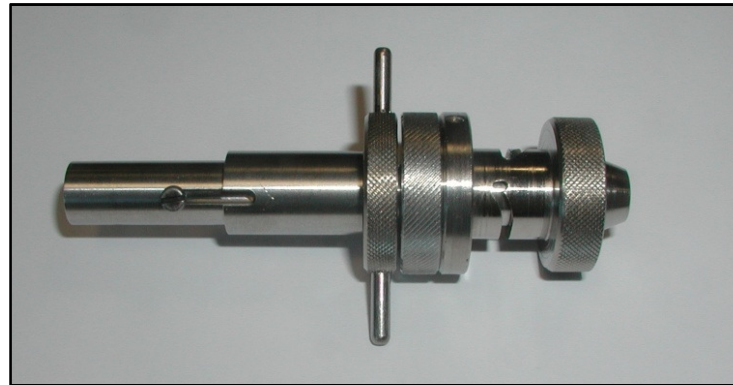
ASSEMBLED INITIAL ACTUATOR
